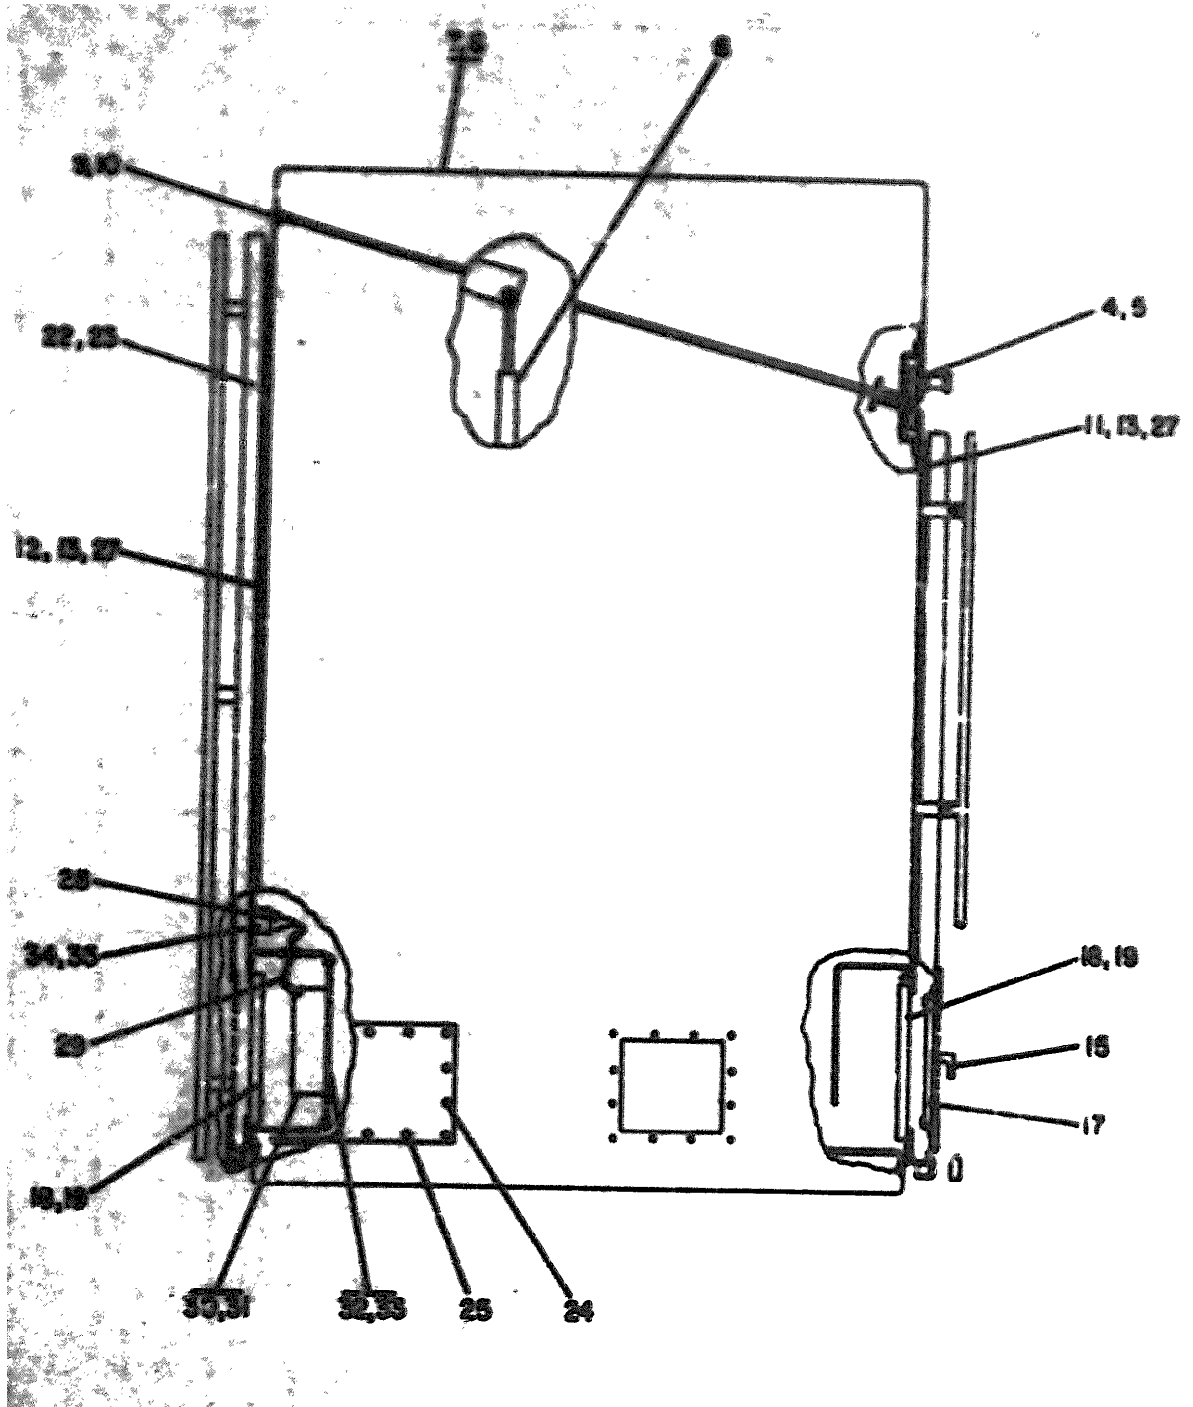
Cabinet, Electrical Equipment (EC-2460) (Sheet 2 of 2).
